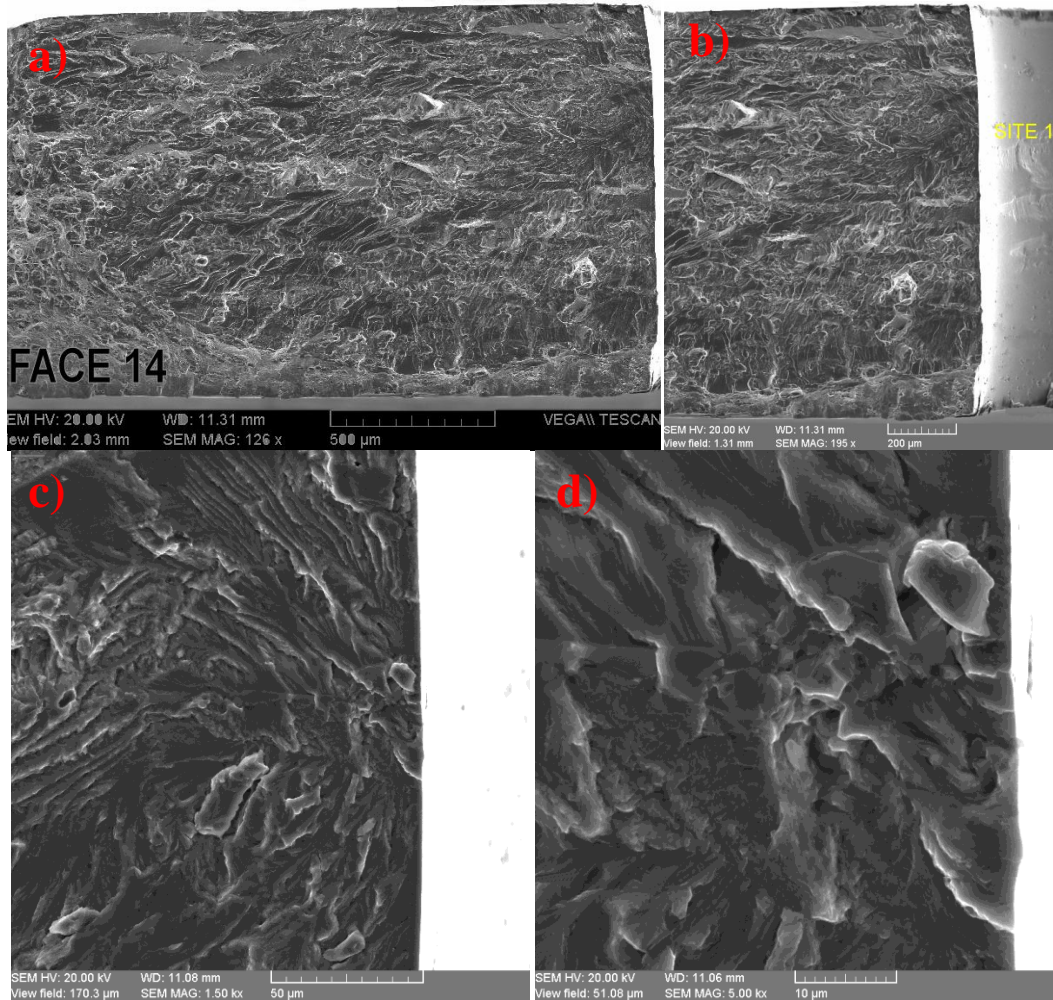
Fracture surface topography and crack initiating particle for sample C-1. Figures a and b show the fracture surface topography and figures c and d show the crack initiating particle.
